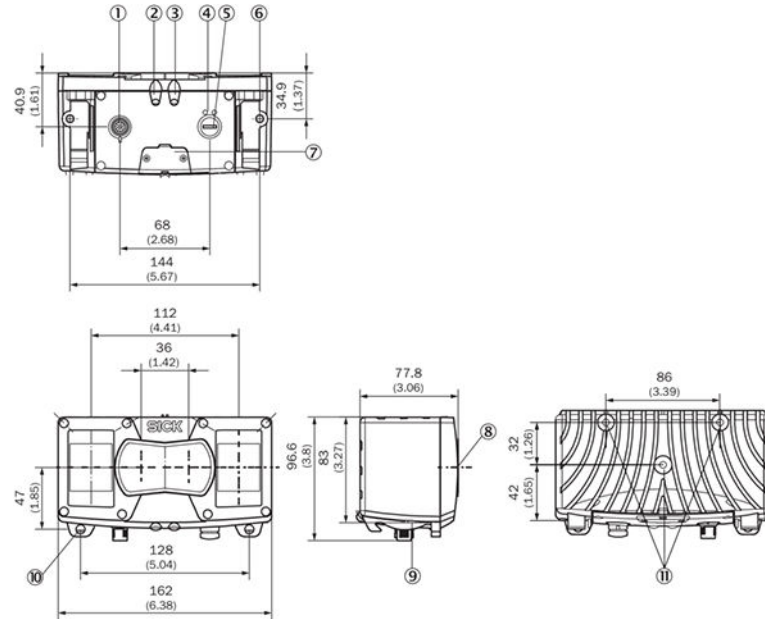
Visionary-S camera dimensional drawing (not true-to-scale)
